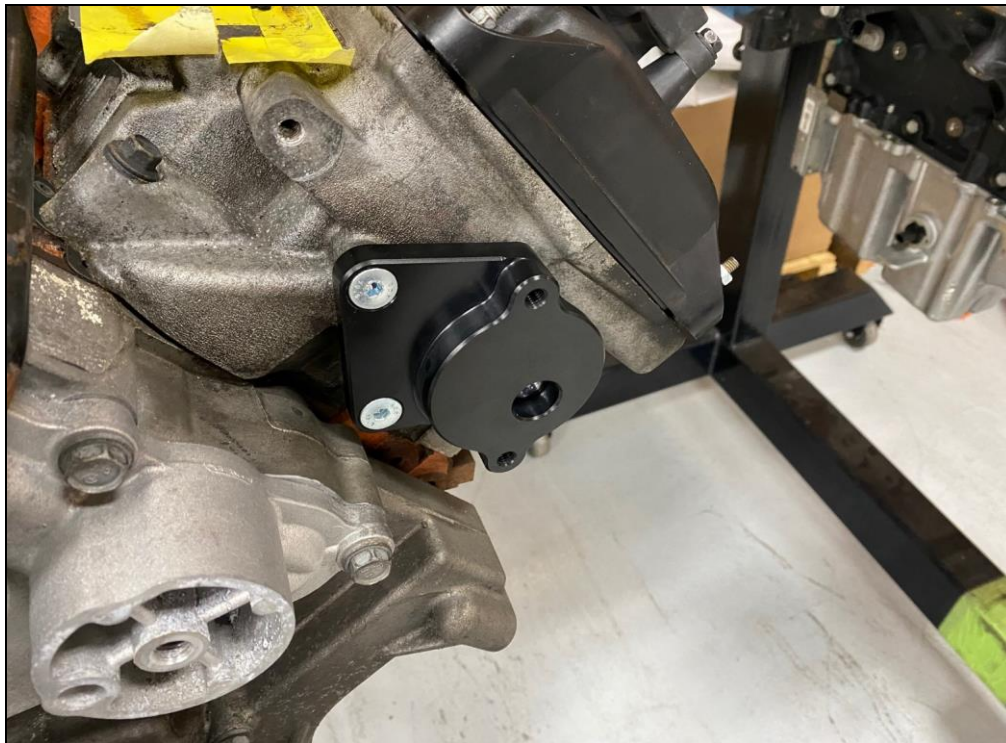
97-380 Adapter Mounting to Gen III Hemi Cylinder Head
